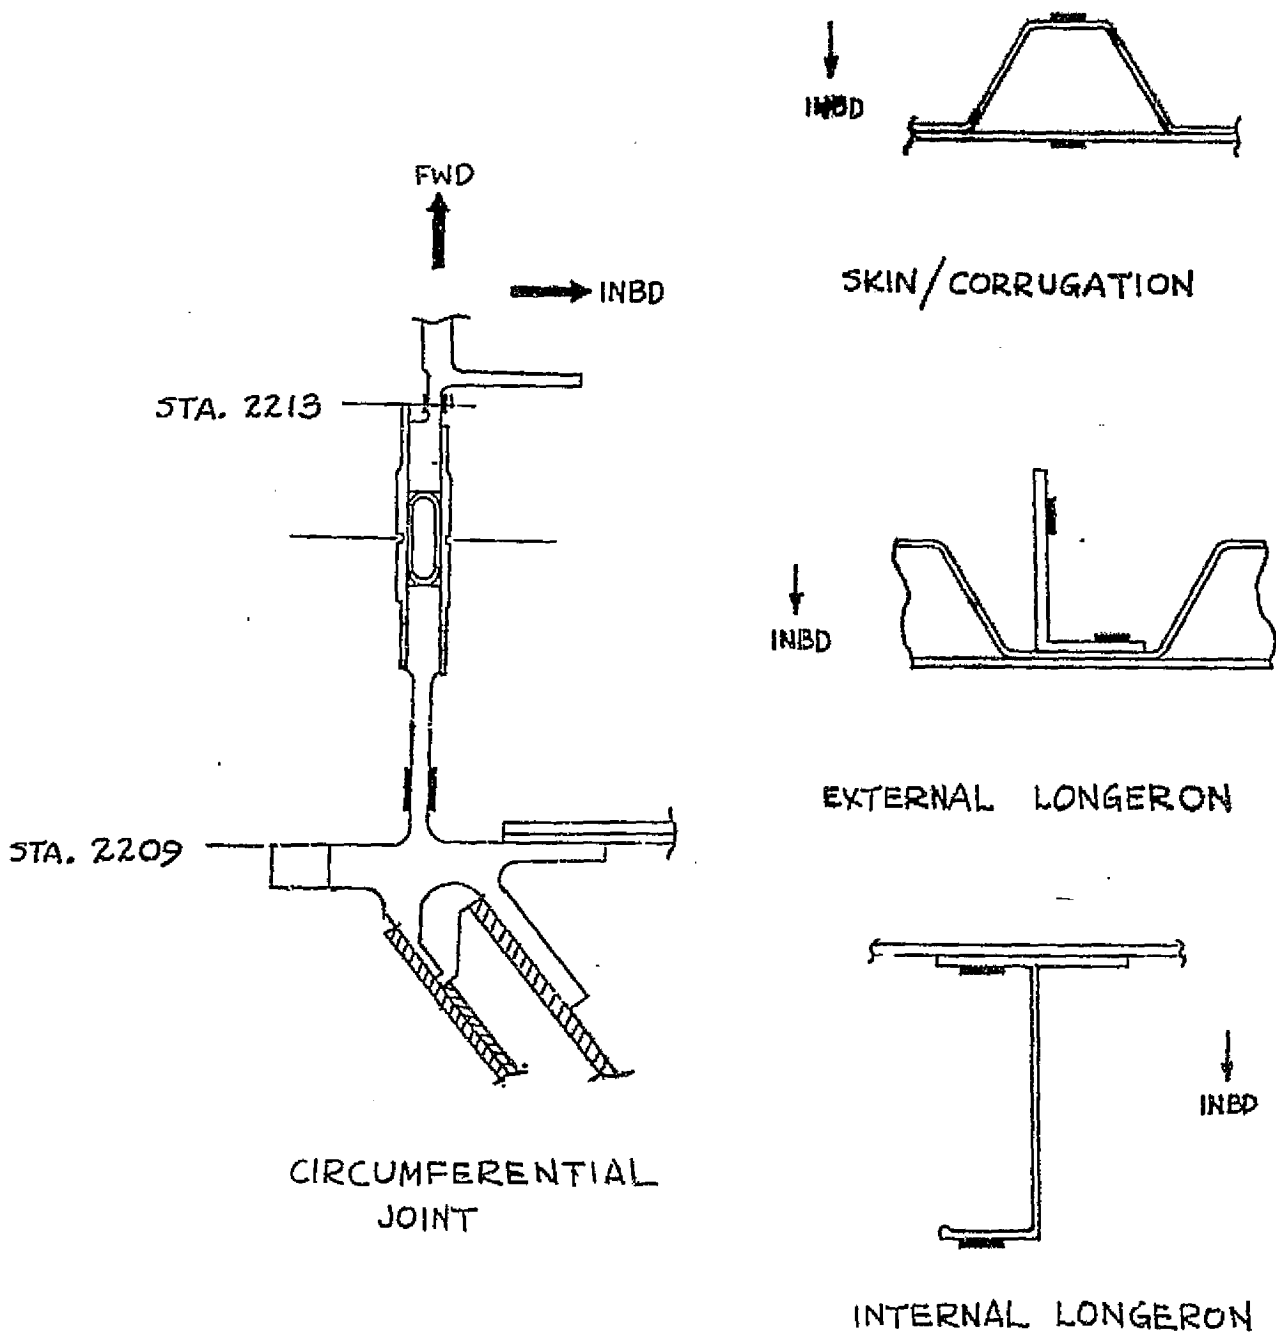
TYPICAL STRAIN GAGE INSTALLATIONS ON CSS.
